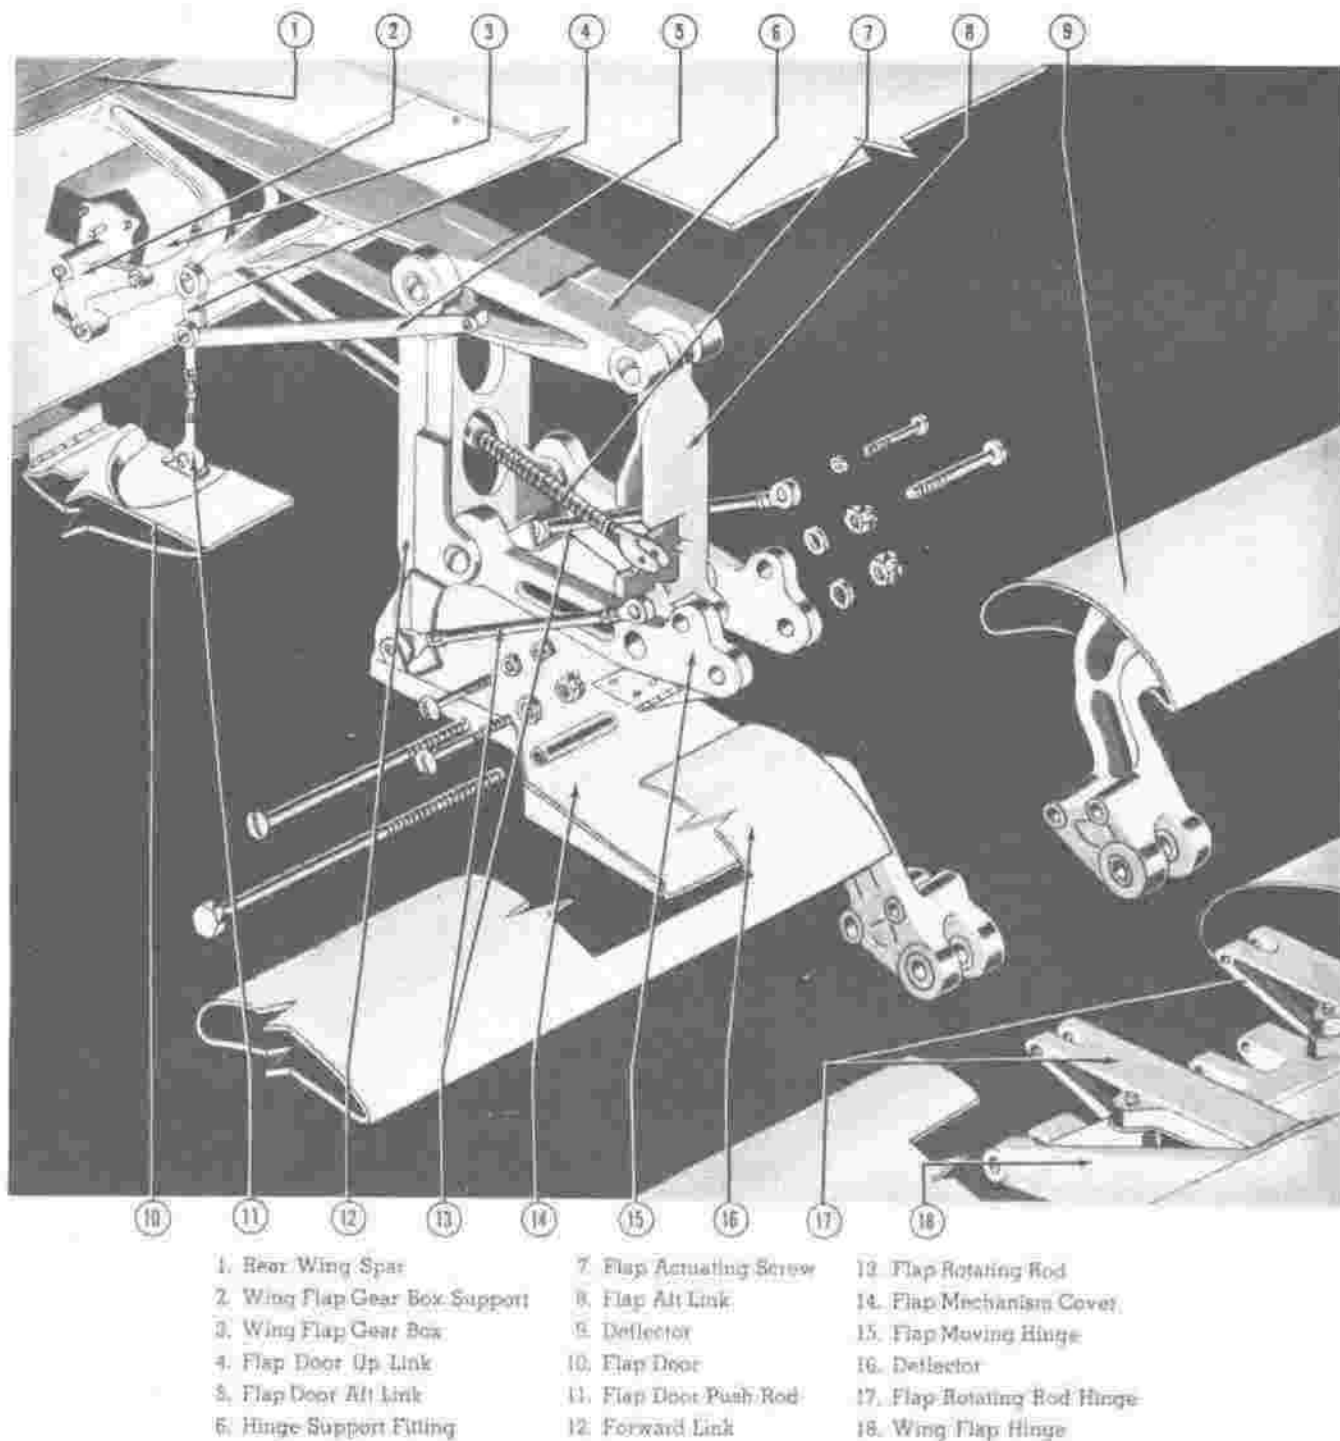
Center Hinge Mechanism Outboard Wing Flaps
